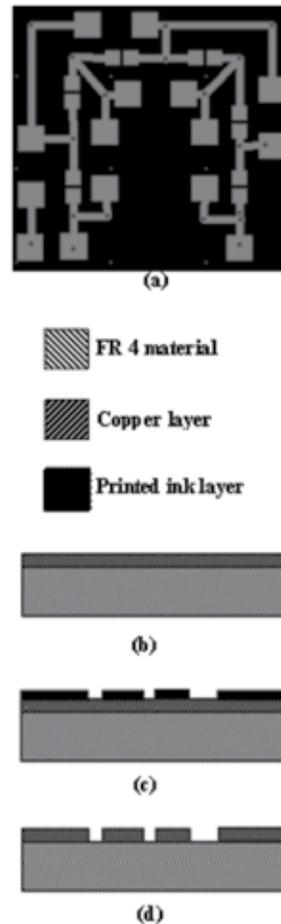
Fabrication process: (a) PCB layout for the converter, (b) Cross-sectional view of copper clad sheet, (c) Ink printed on copper clad sheet, (d) Copper clad sheet after etching and ink removal process
